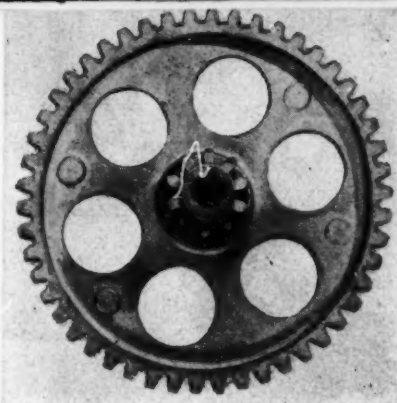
Top Right—Investment-cast Hastelloy alloy C gears for a steel mill pickling tank drive
